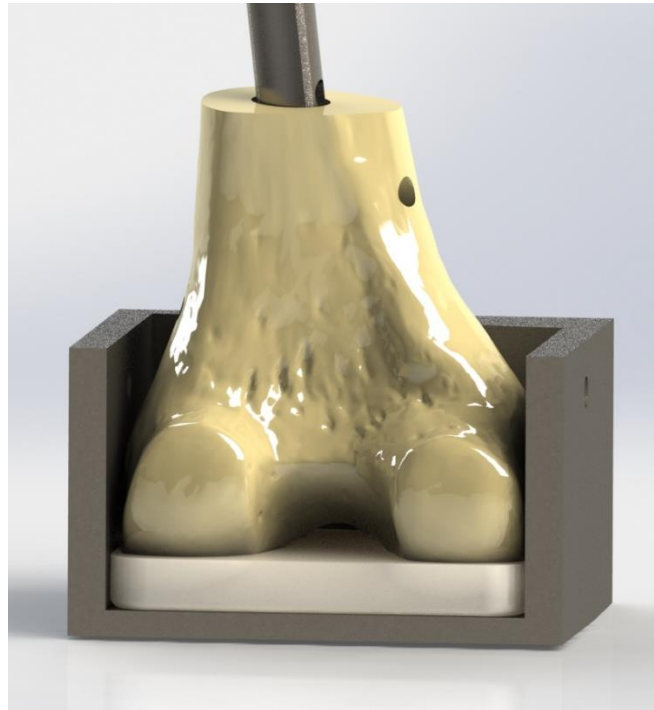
Section view of testing fixture box to show HDPE custom machine insert
